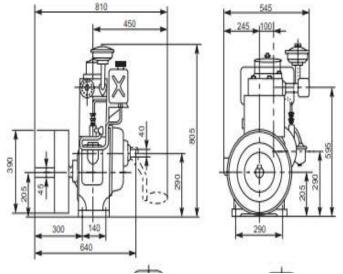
shows a typical catalogue drawing, showing the overall and principal dimensions.
